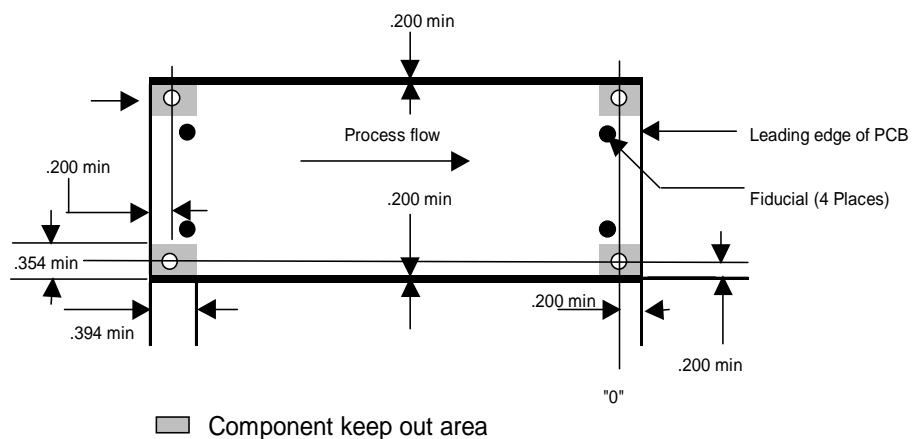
Tooling Hole Clearances and Placeable Area for SMT
